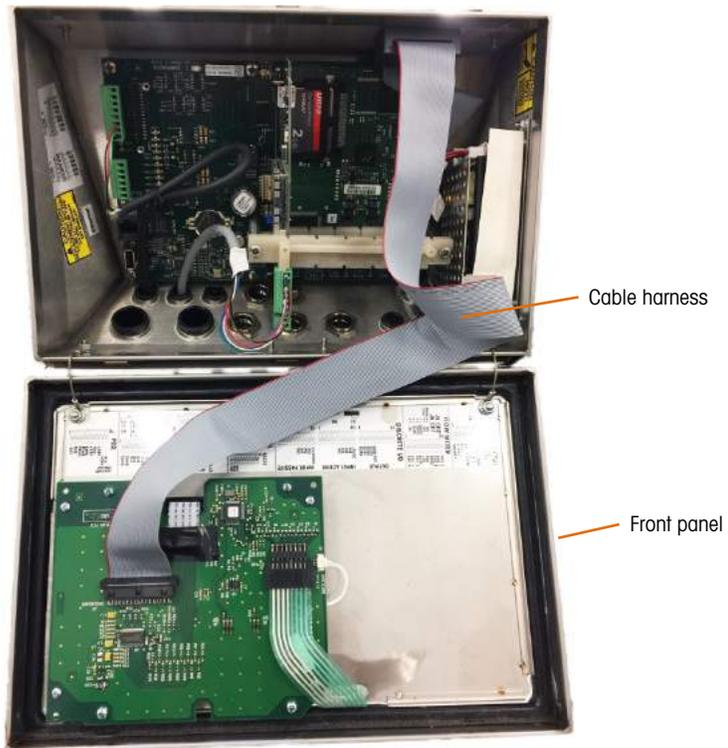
Front Panel Reversed, Longer Cable Harness Installed
